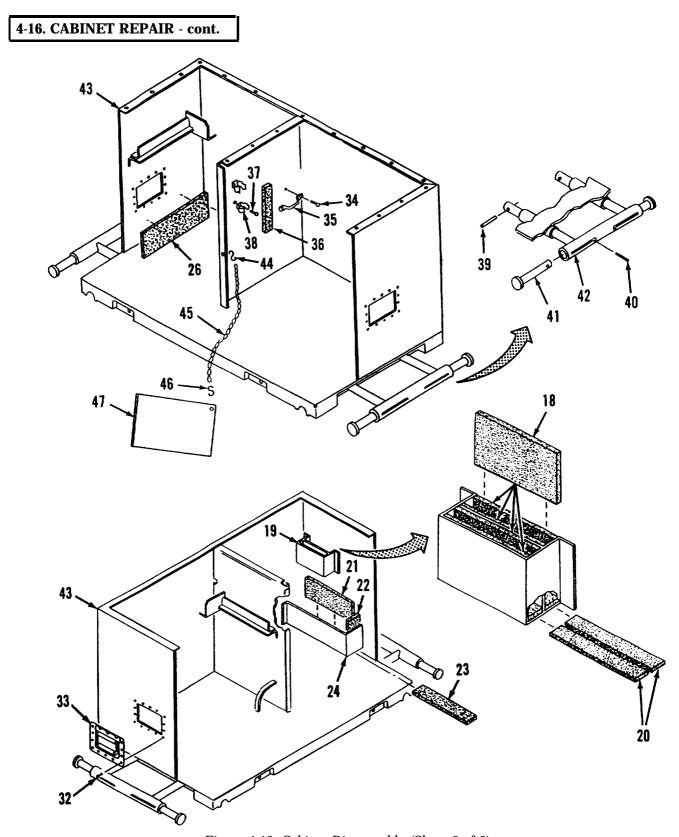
Cabinet Disassembly (Sheet 2 of 2).
